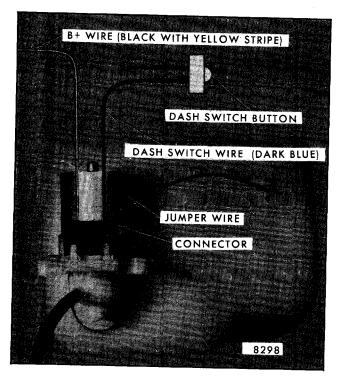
Jumper Wire from Dash Switch Motor Terminal to Ground
